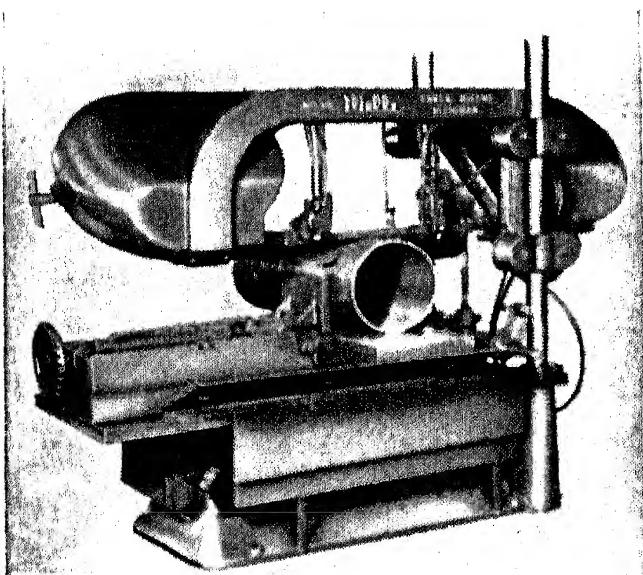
A No. 12 horizontal metal cutting band saw with a 12 in. by 16 in. stock capacity. (Courtesy Wells Manufacturing Corp.)
